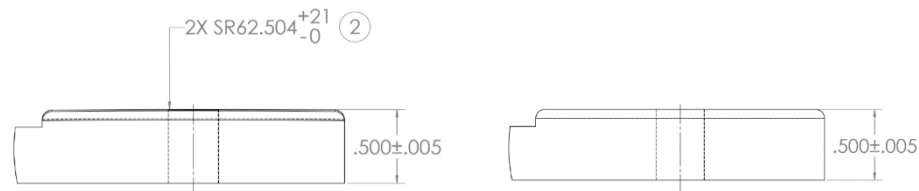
Drawing of the convex (left) and flat (right) interfaces
